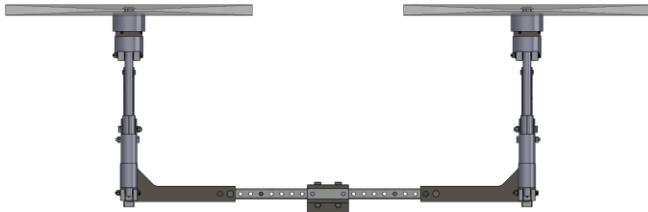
Front view of large gap, with 24 inch diameter rotors.
